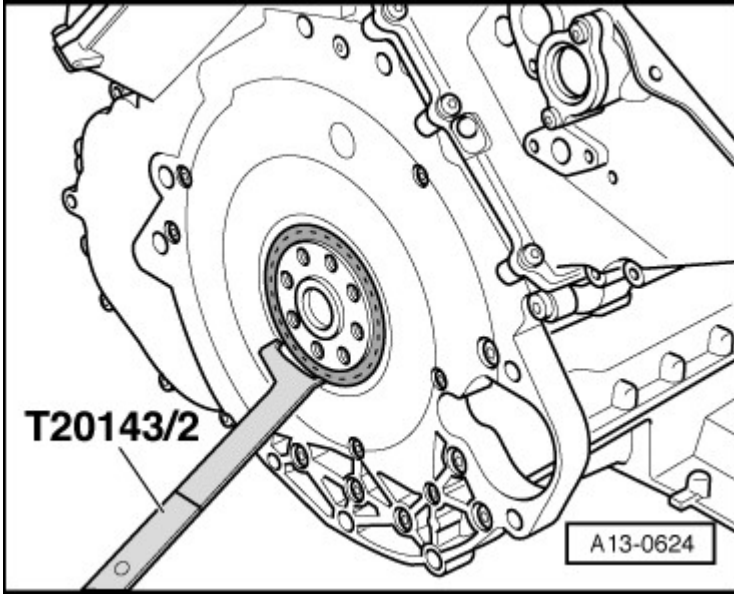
Prying Out Sealing Ring Using Extractor Lever T20143/2
